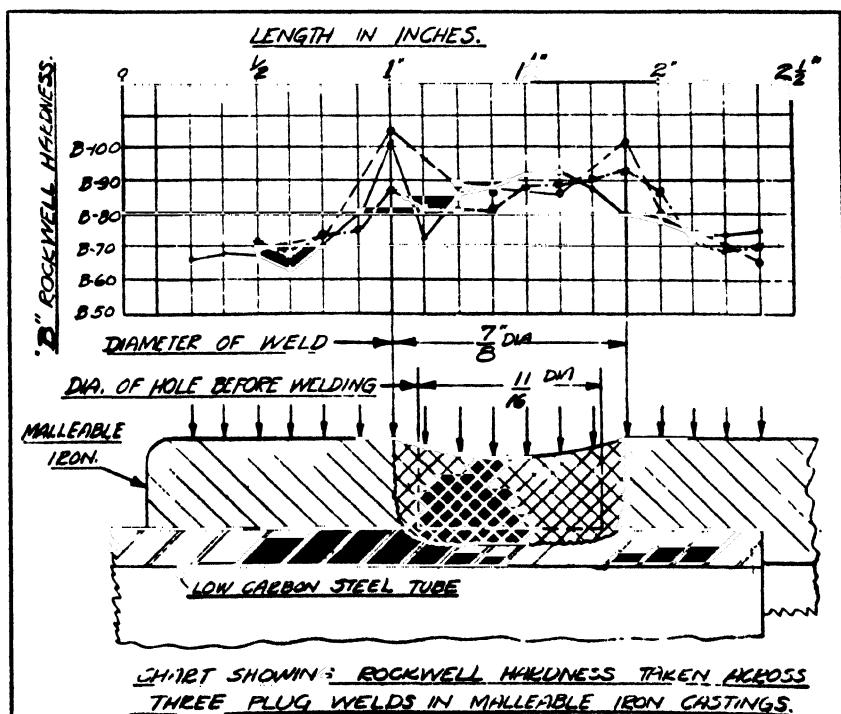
Rockwell hardness across plug welds in malleable iron castings.
